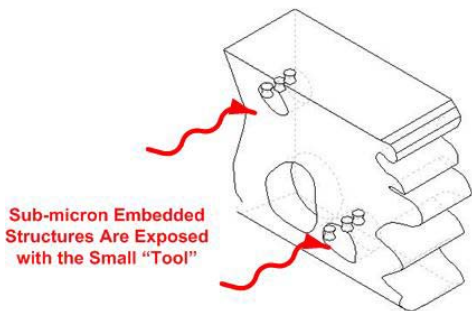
Use of Small ($<1\mu$) Exposure Tool to Micromachine Embedded Features (Superimposed on final micromachined component)
